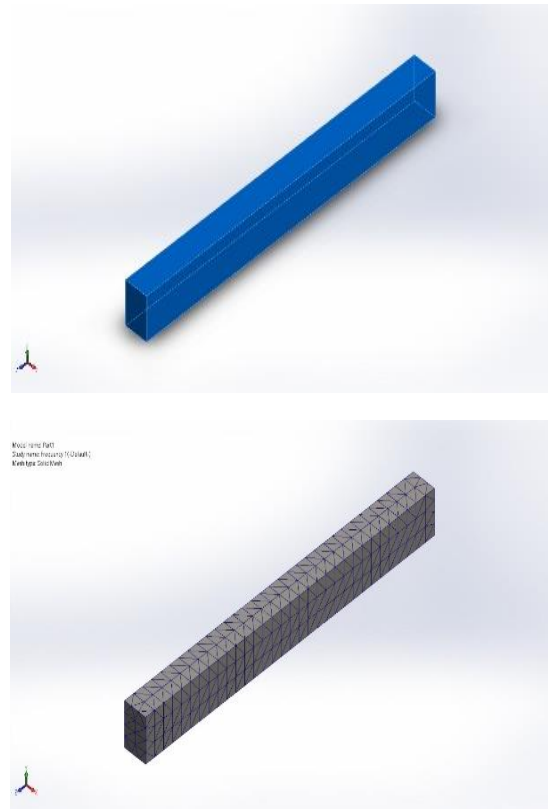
steel beam of specified dimension and meshed cantilever beam
